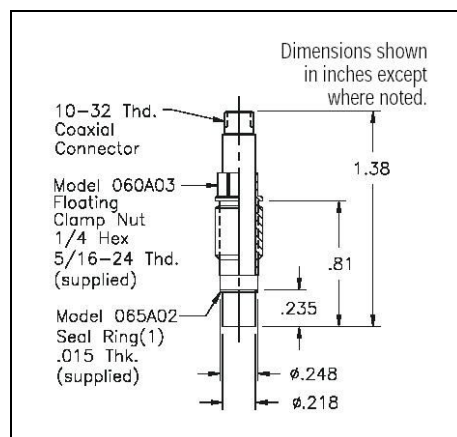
Drawing of the PCB transducer, model 113A21 [163].
